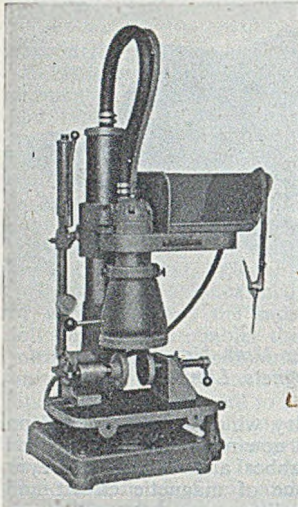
Bench-type Core-blowing Machine Newly Introduced by Fordath Engineering Company, Limited.
